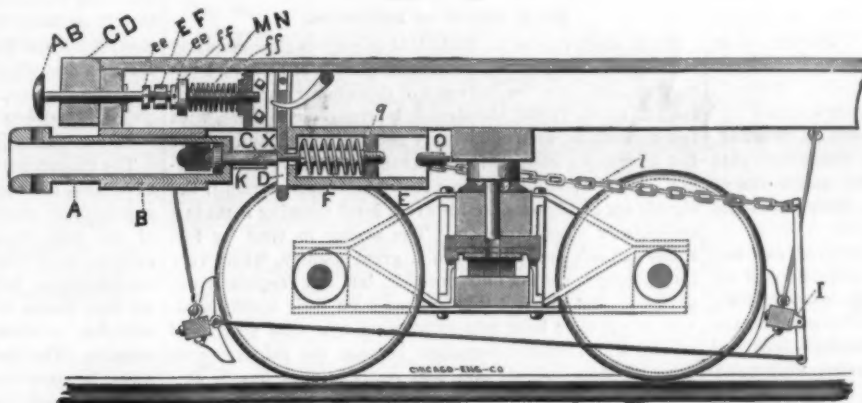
VERTICAL SECTION WITH DRAW BAR PULLED OUT.
